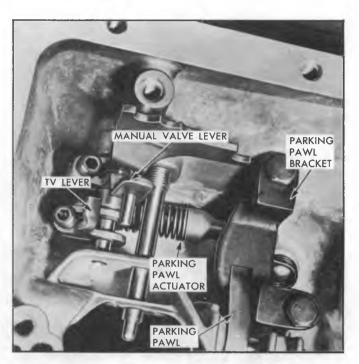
PG-Inner Control Levers, Parking Pawl and Bracket
